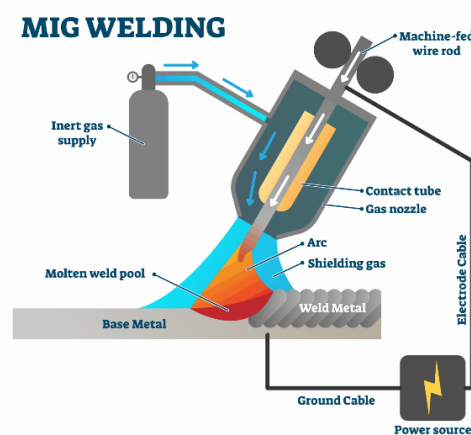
Metal inert gas welding (MIG) (Sild, 2022b)
